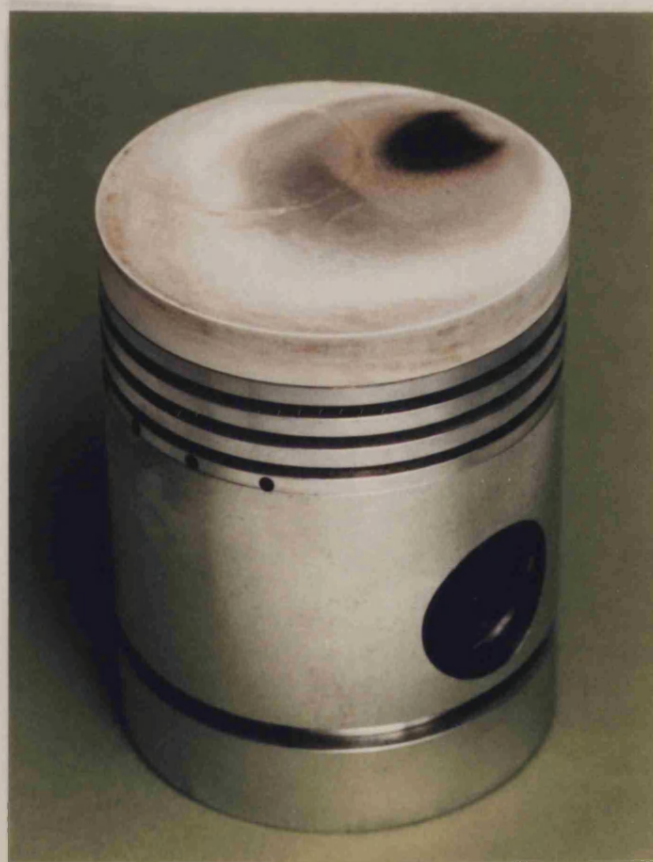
Cleaned piston assembly with Cordierite cap after running in the firing rig.
